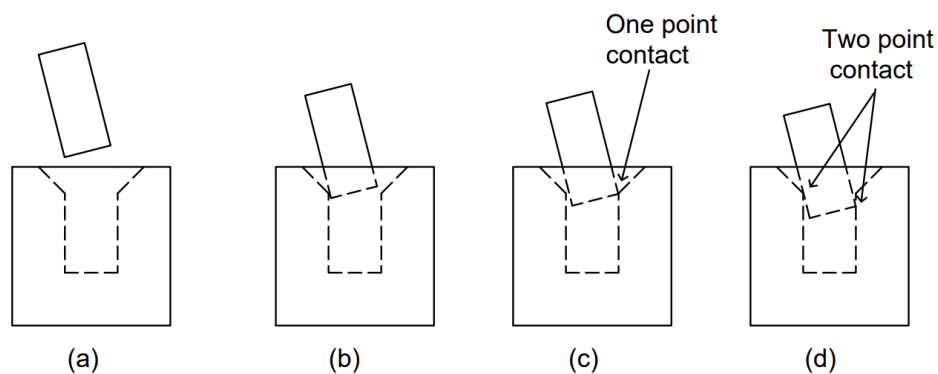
Four stages of assembly: (a) approach, (b) chamfer crossing, (c) one-point contact, (d) two-point contact
